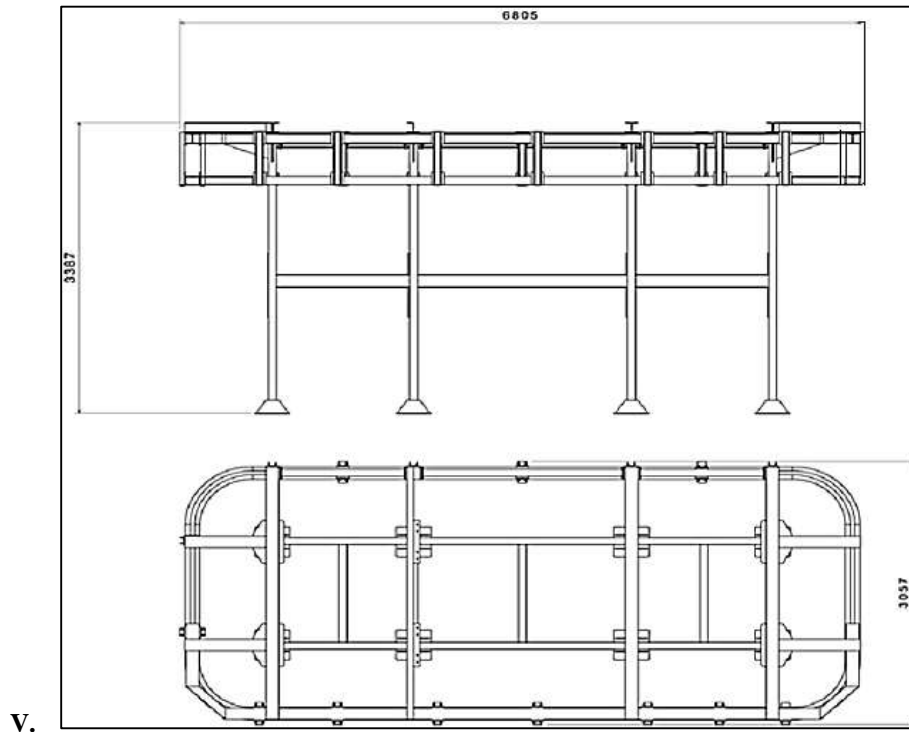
All dimensions are in mm Overall dimensions of overhead conveyor
